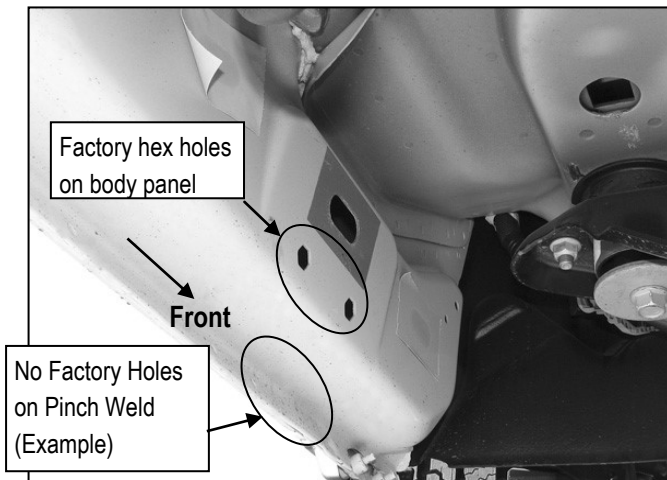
Driver Center & Rear Mounting Bracket Assembly
